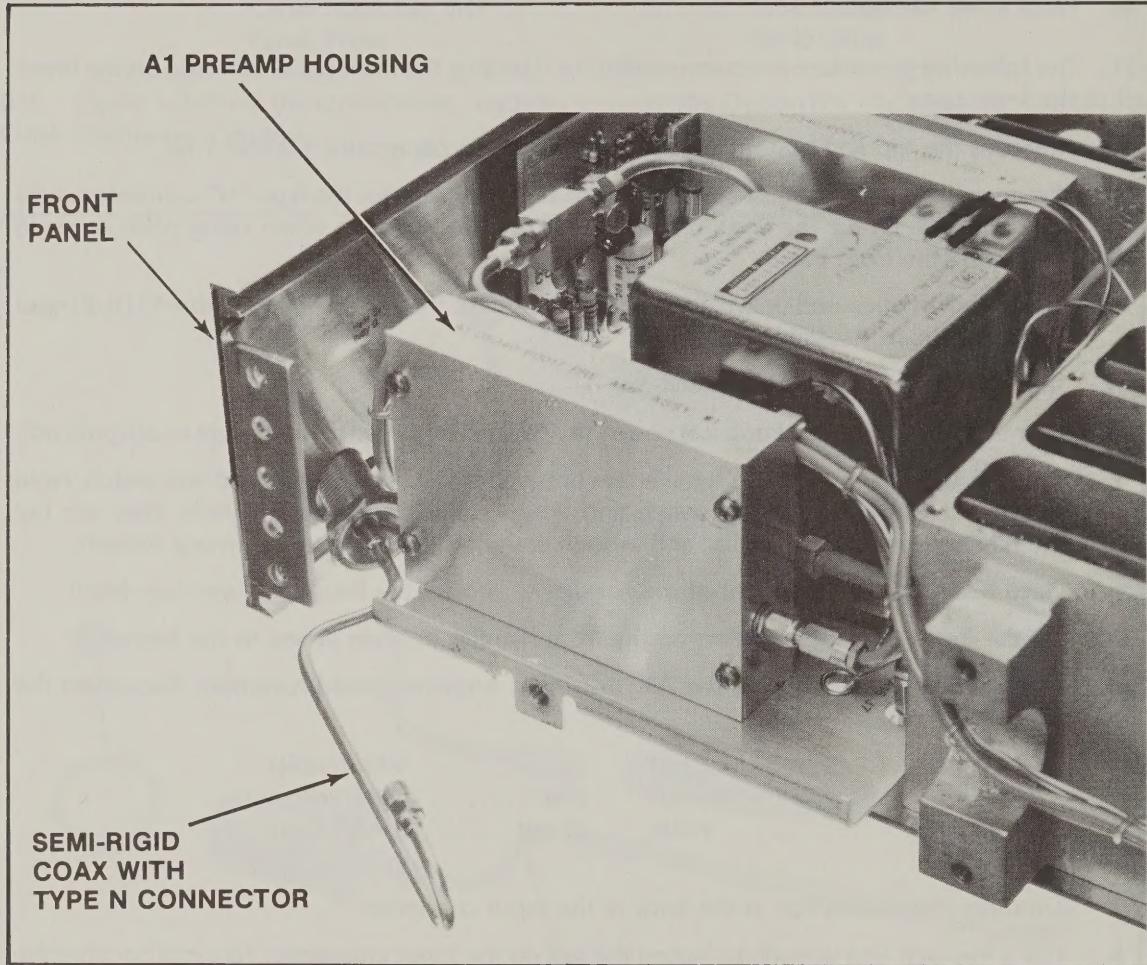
Type "N" Connector Installation for Option 006 (Side View)
